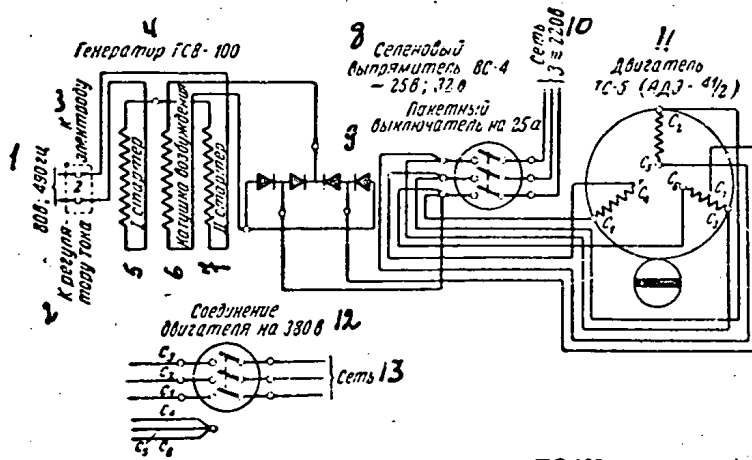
PT-100 welding unit circuit diagram:
